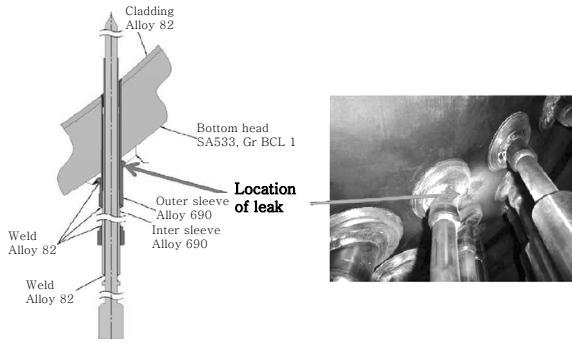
Calvert Cliffs Unit 2 pressurizer heat sleeve assembly configuration and leakage location2)
